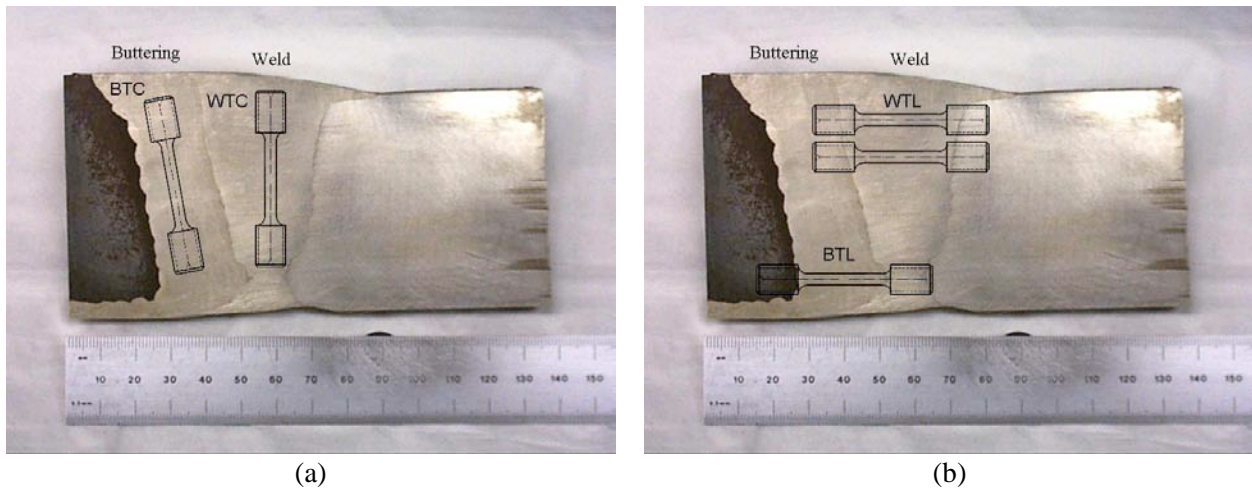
Schematic of the tensile specimens fabricated from the V.C. Summer weld piece for (a) “C” and (b) “L” orientations.
